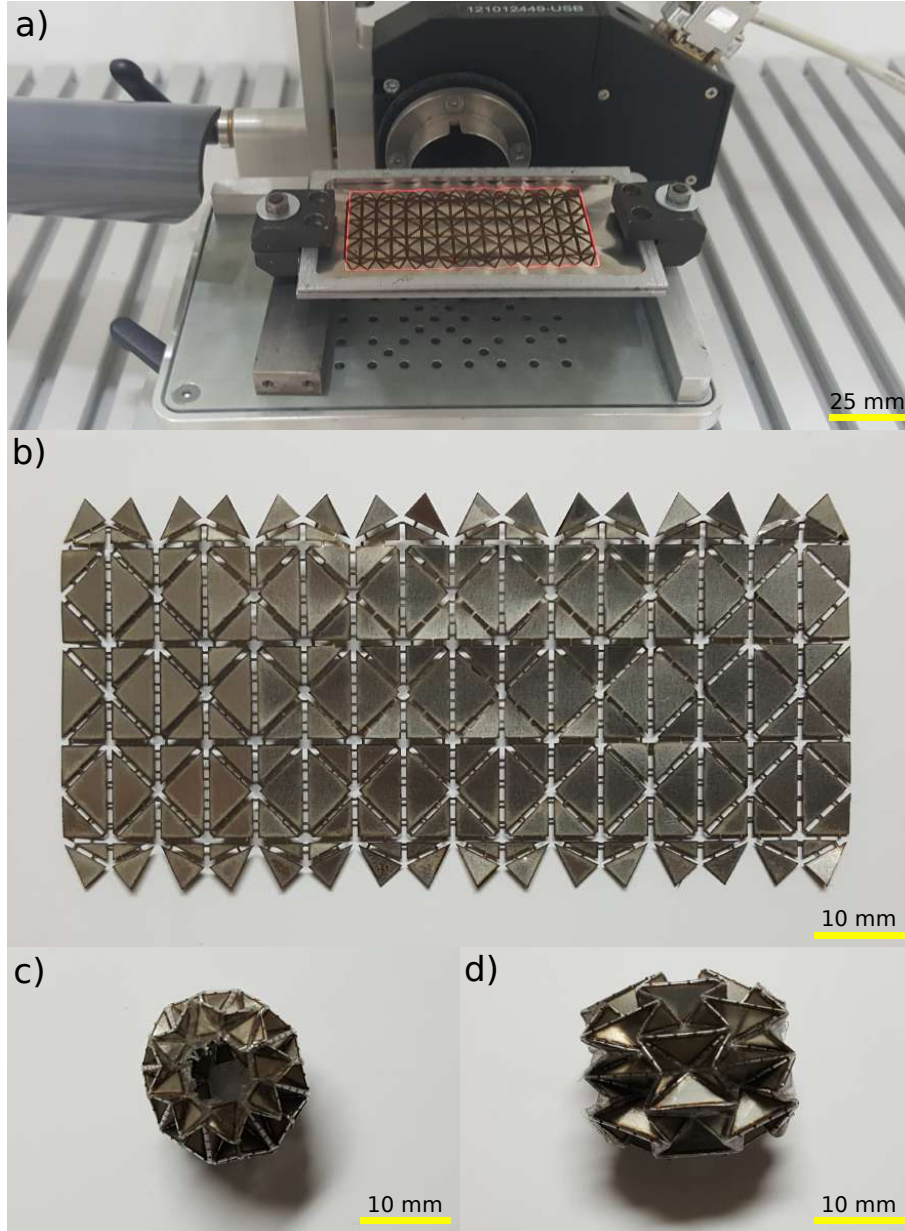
2D fabrication technique using a laser cutter for milli-origami devices. a 0.6 mm wide stitch-like pattern of a magic wheel [Lee et al., 2013] was engraved on $100\ \mu\text{m}$ sheet of stainless steel, (a) using a straightening support. The pattern was then cleaned (b) before being folded to a milli-magic wheel, (c) a top view and (d) a side view.
